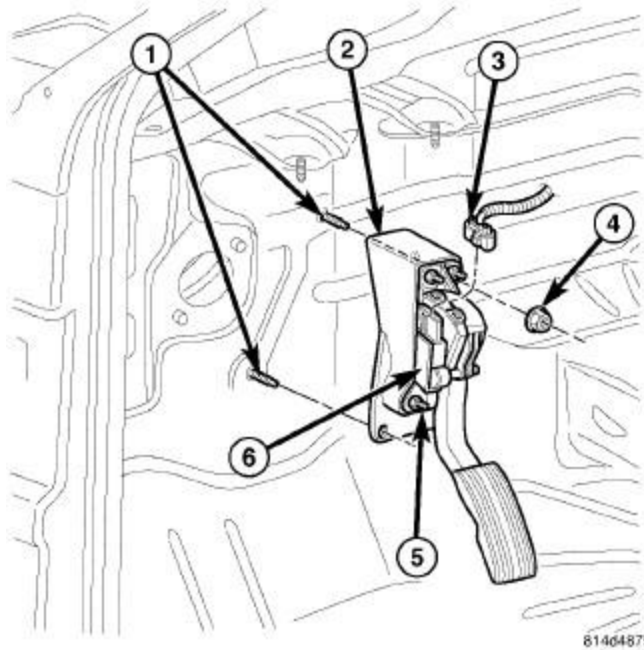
Removal & Installation Of Accelerator Pedal W/Apps
